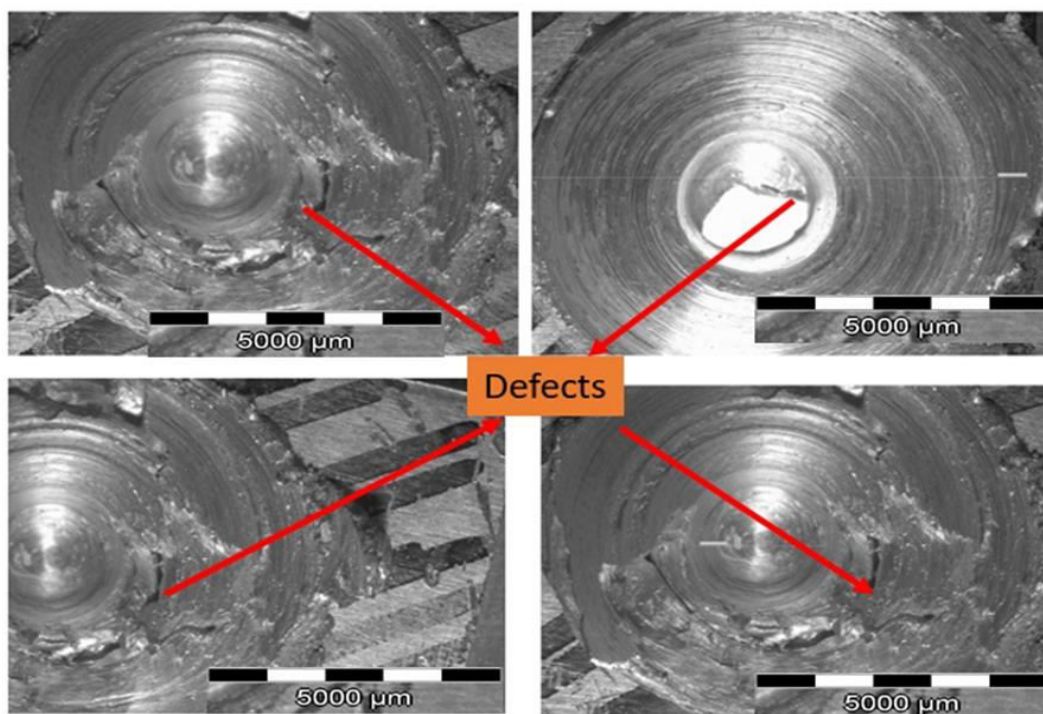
Defects in the spot welds during optimization of welding parameters.
